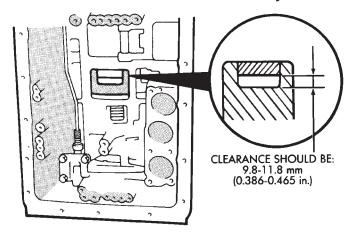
Installing Front Planetary And Forward-Direct Clutch Assembly
